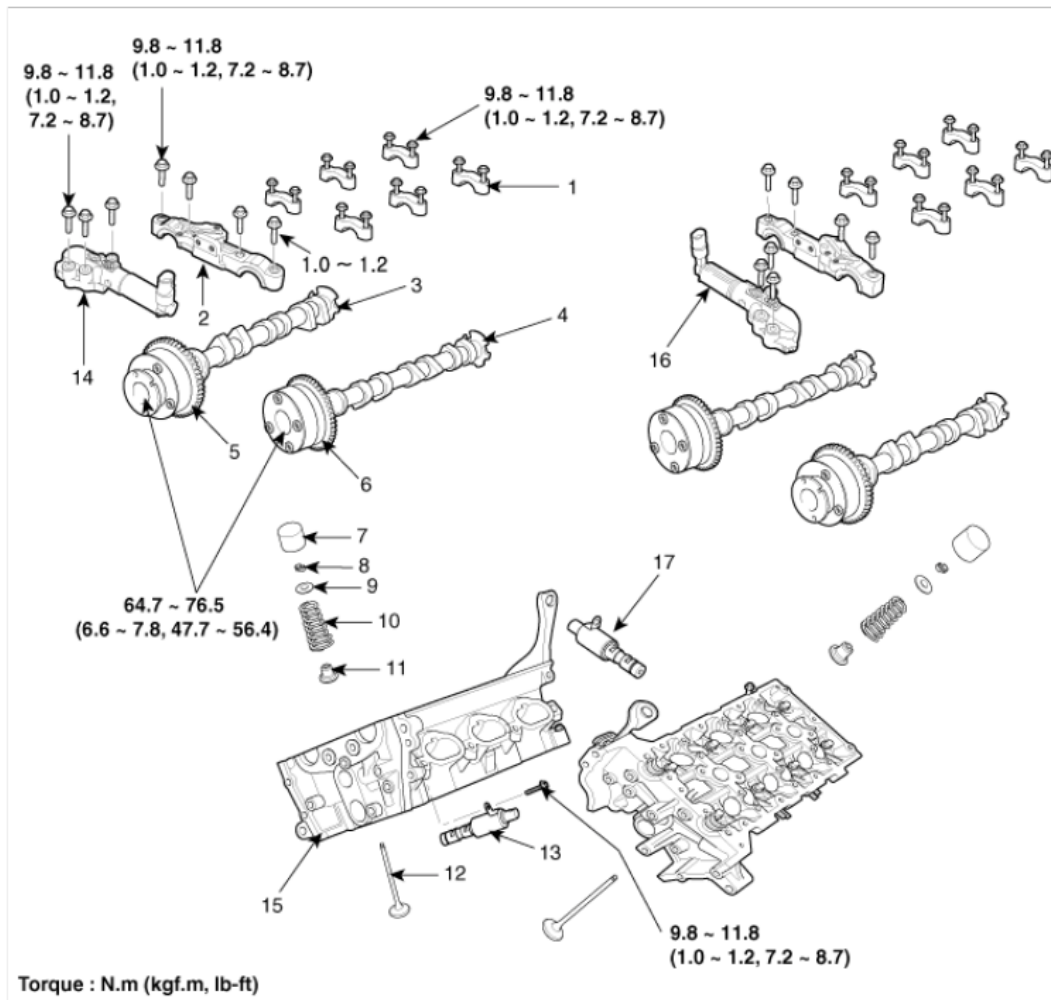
Disassemble View Of Cylinder Head Assembly With Torque Specifications
